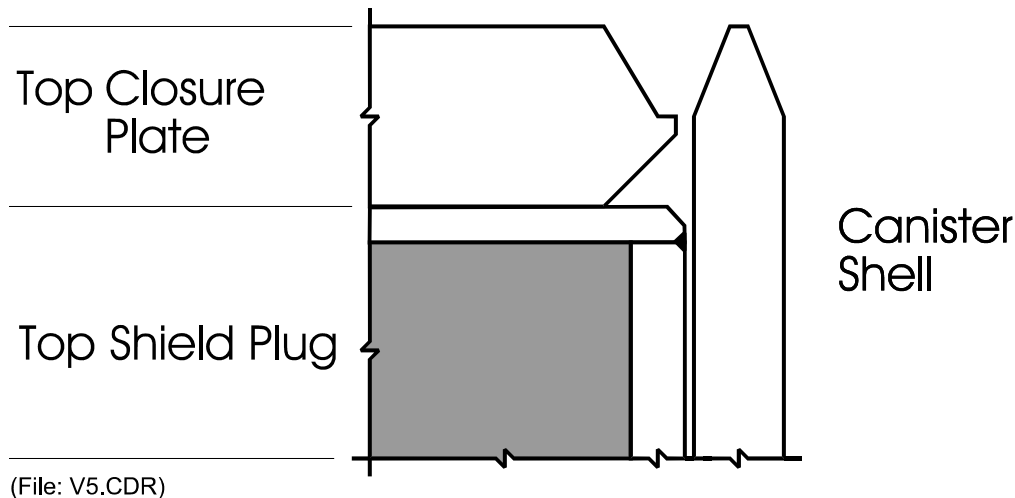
Modified Canister Closure and Weld Configuration
